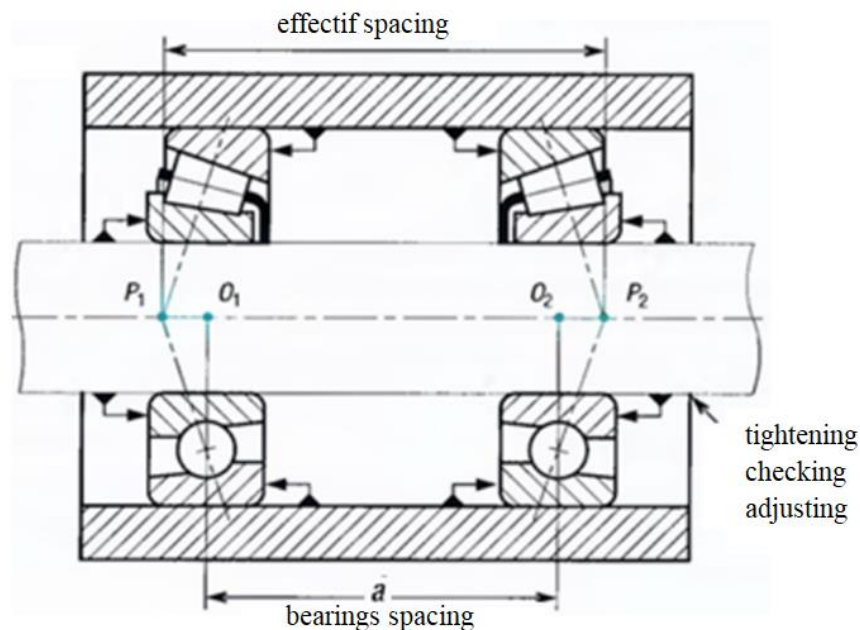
15: Mounting of a rotating shaft and fixed housing (X).
